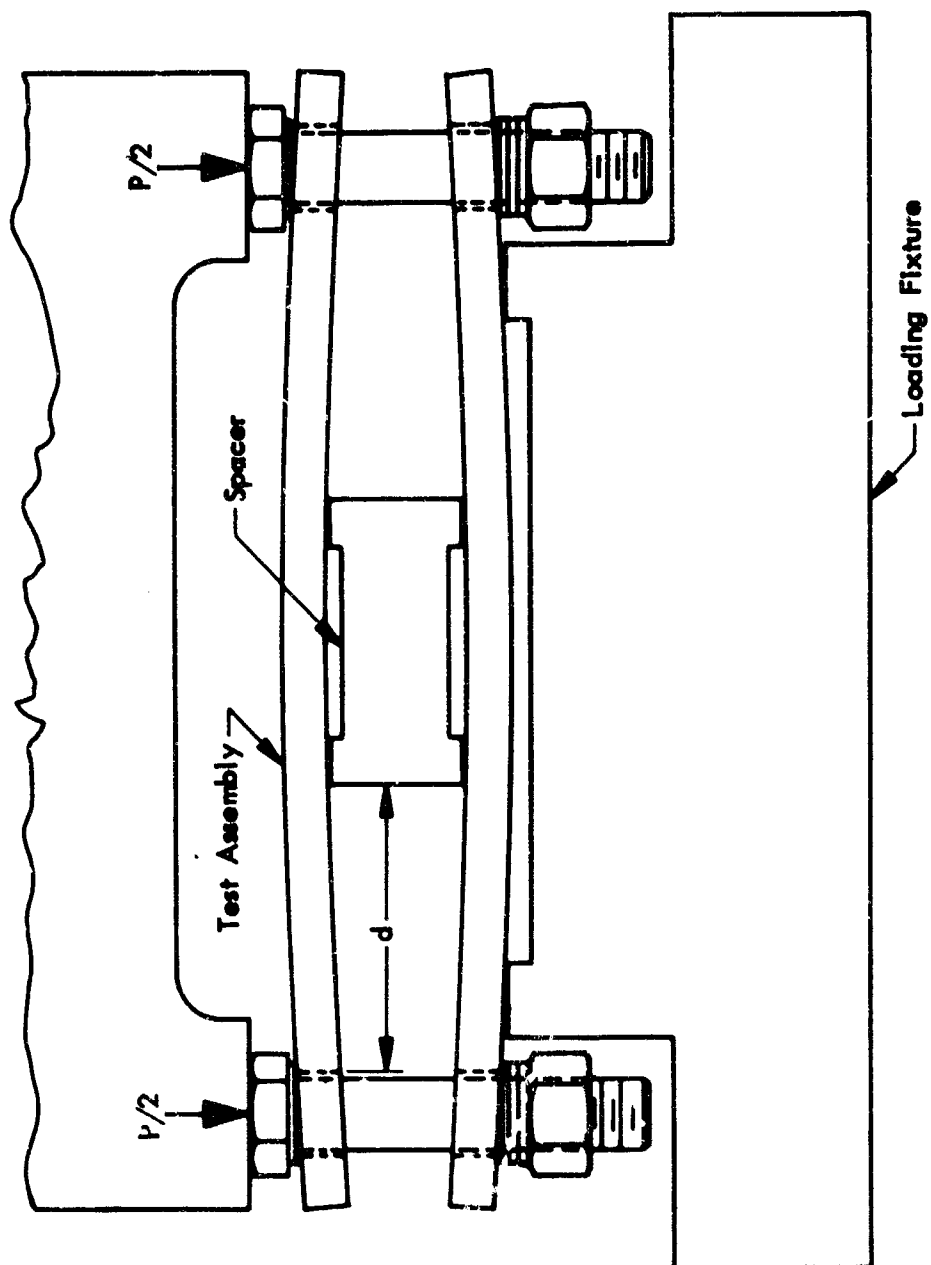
SFB SPECIMEN ASSEMBLY PRELOADING (Four Point Bend)
